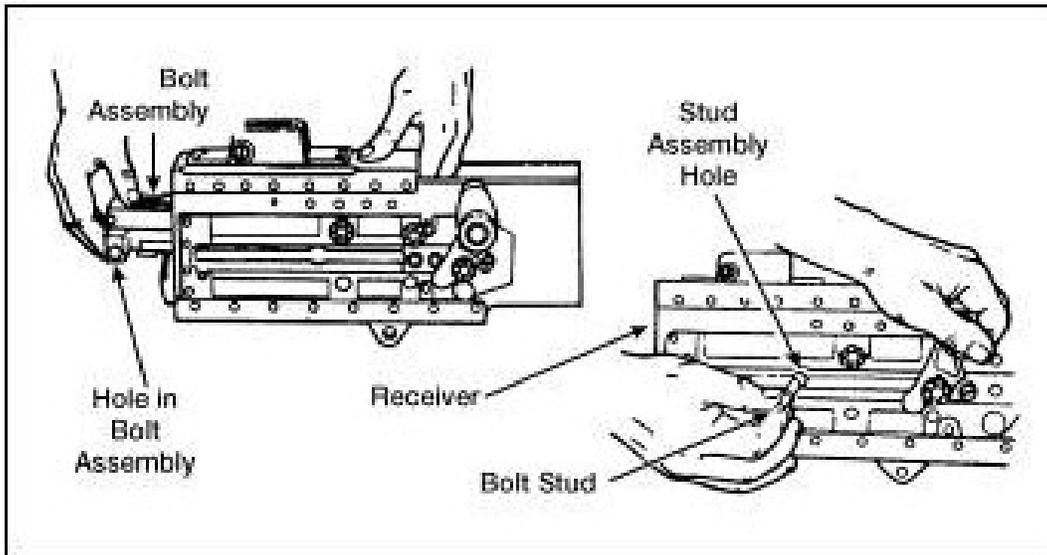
ST-1025_40 (Installation of the bolt assembly)
